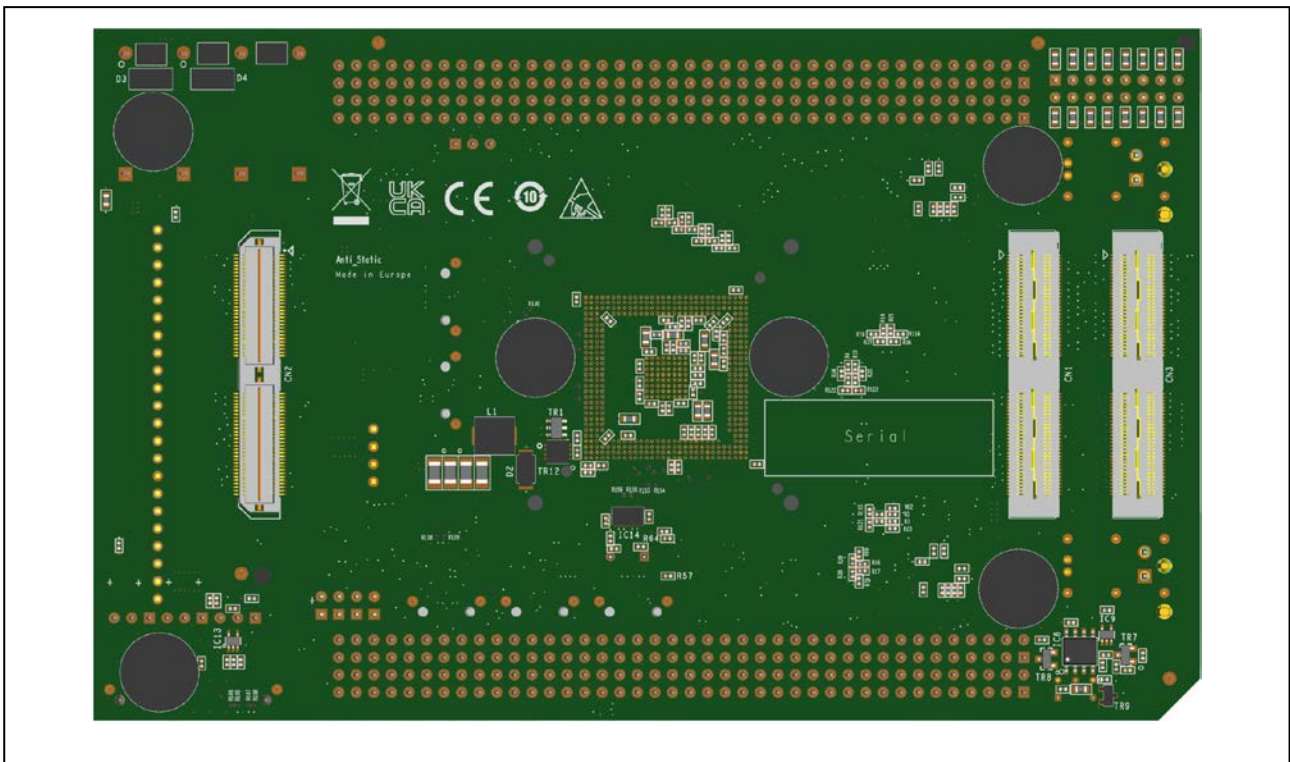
D018177_06_V01 Piggyback board bottom view
